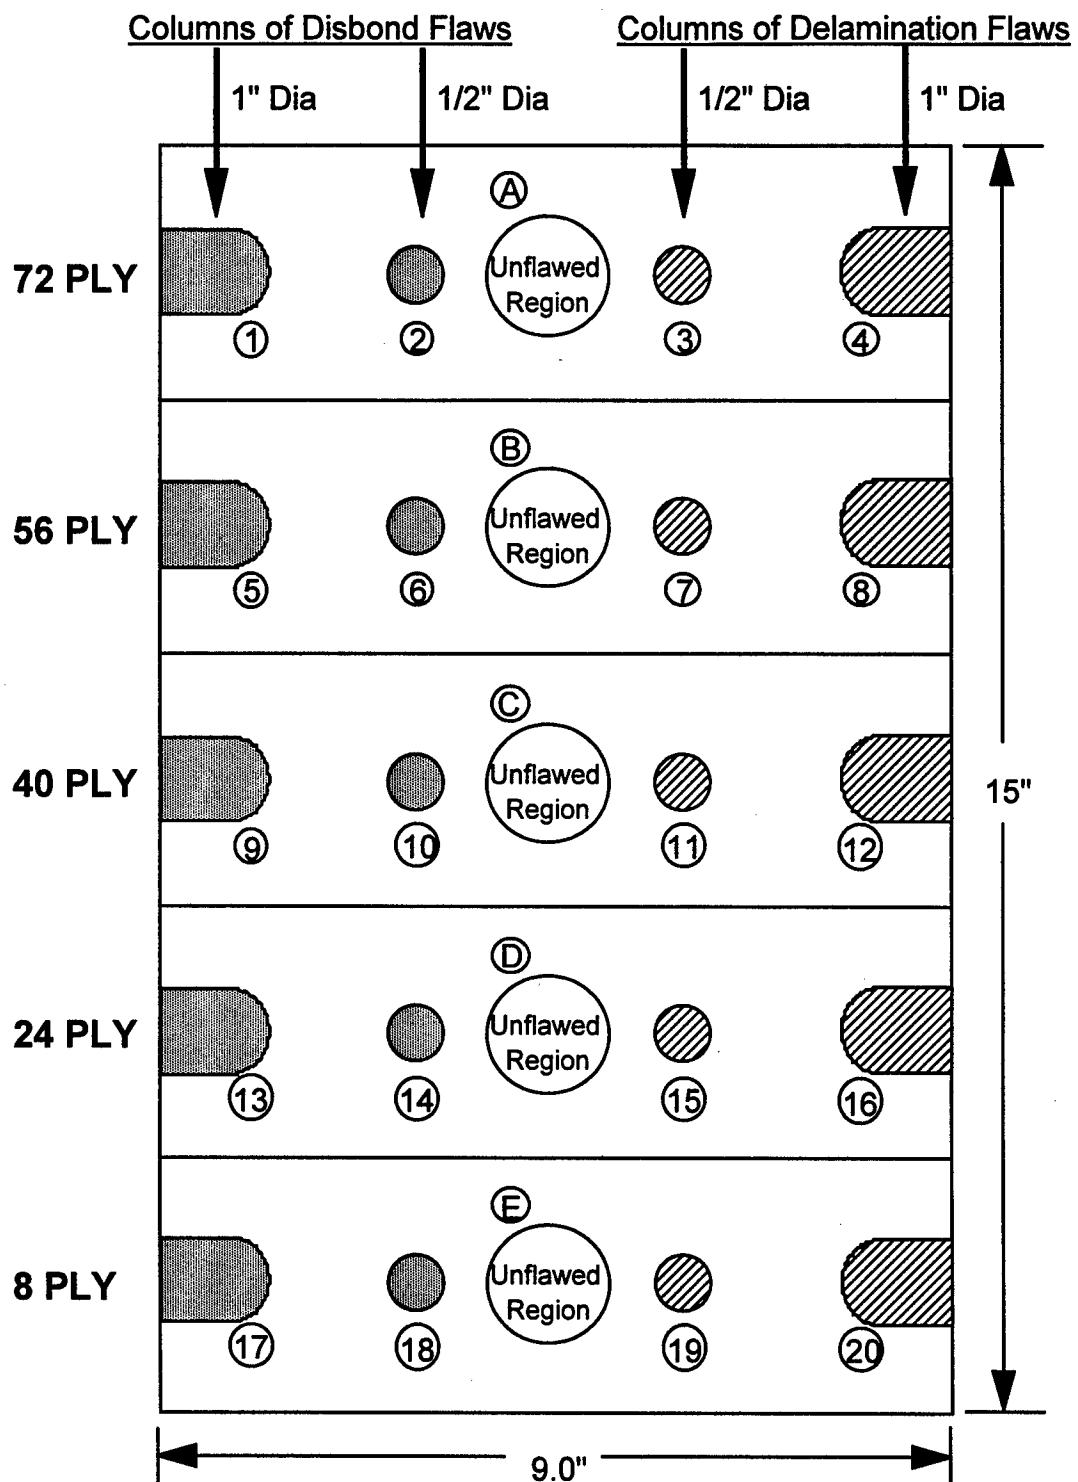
(a): Composite Doubler Calibration Standard for Ultrasonic Inspections
